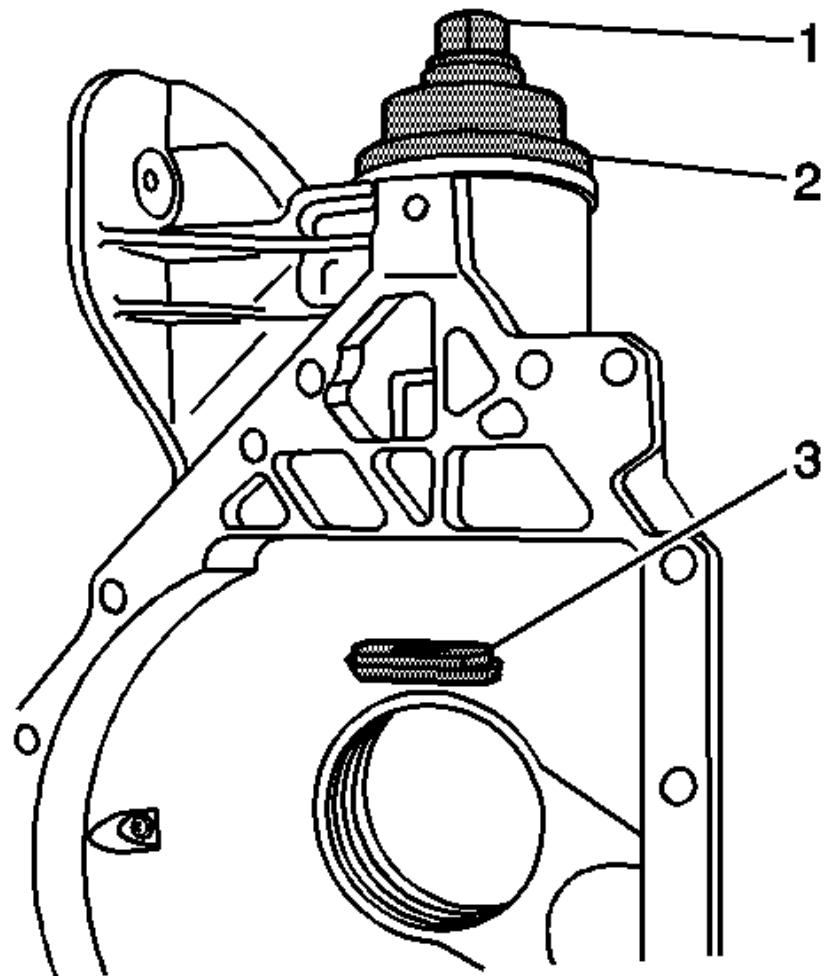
Forcing Screw, J 45754-2 & J 45754-4
